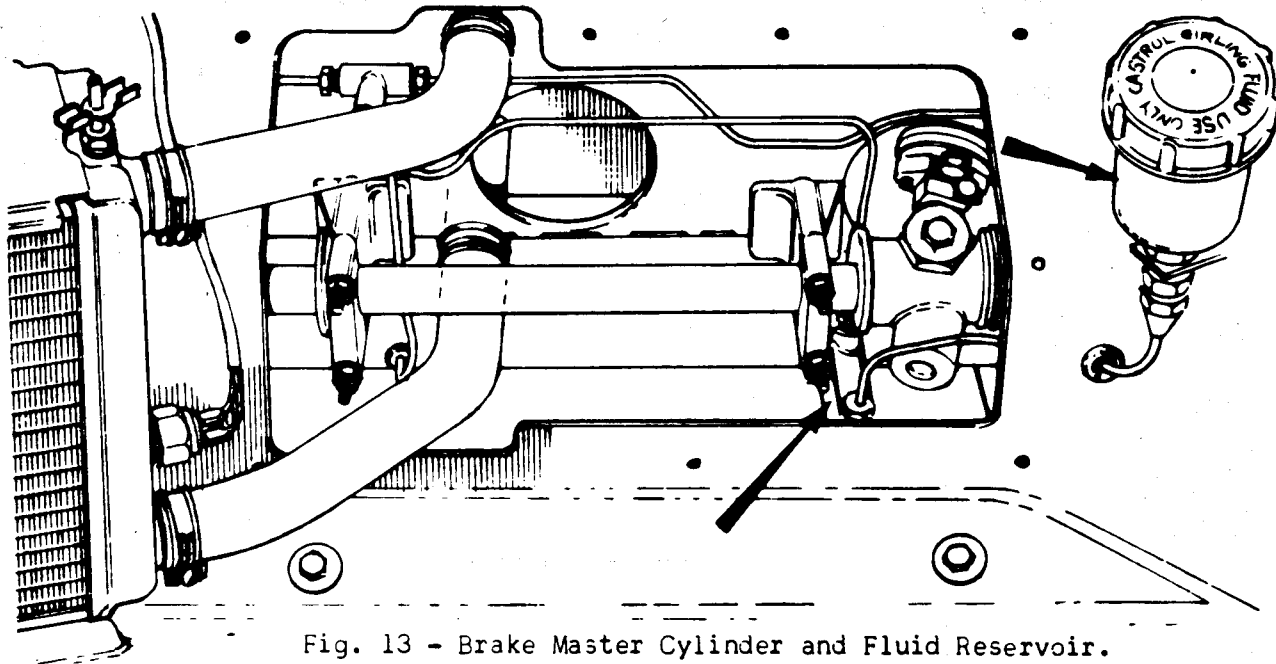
Brake Master Cylinder and Fluid Reservoir.
